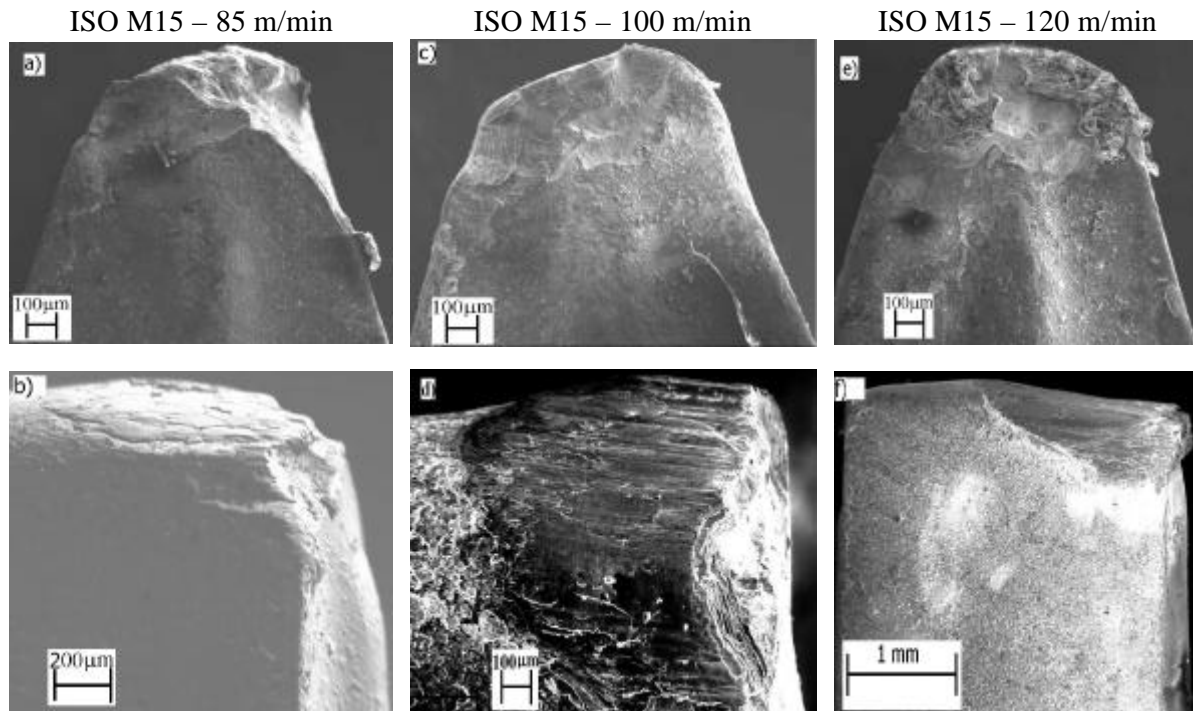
Tool surface and flank wear in the machining of Ti-Al-4V for different cutting speeds using ISO M15.
